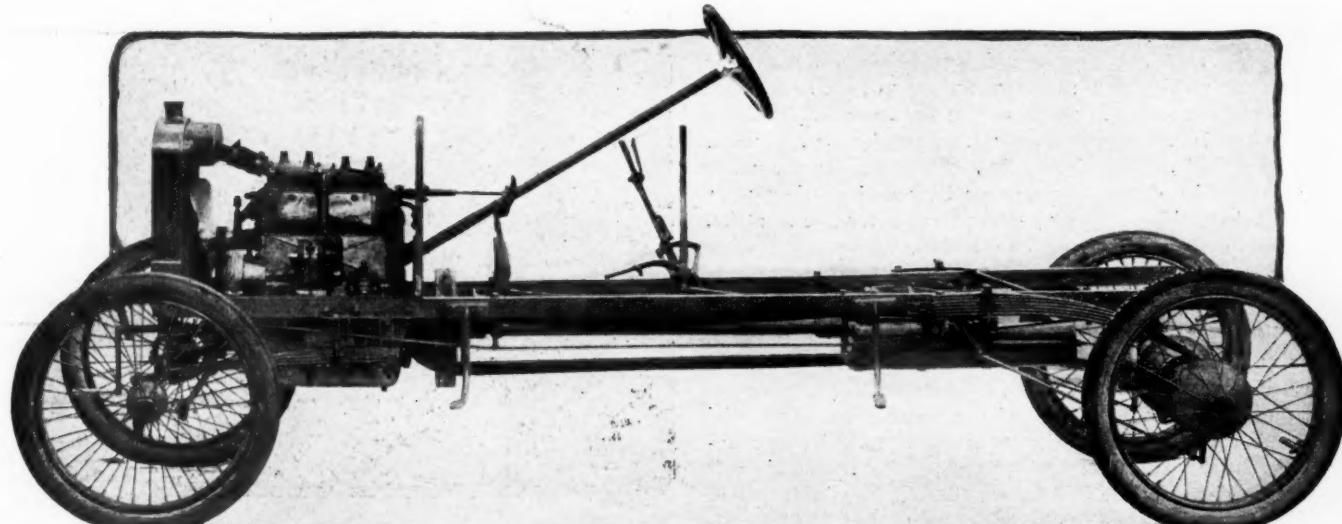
Chassis of Marshall Arter light car with cylinders  $59 \times 100$ . Gearset and back axle are combined. Note use of quarter-elliptic springs front and rear. The propeller shaft has a spring drive to resist sudden starting strains
